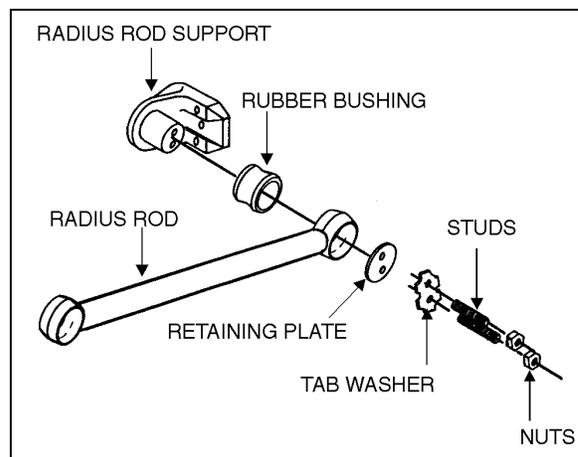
TYPICAL RADIUS ROD SETUP 16010
